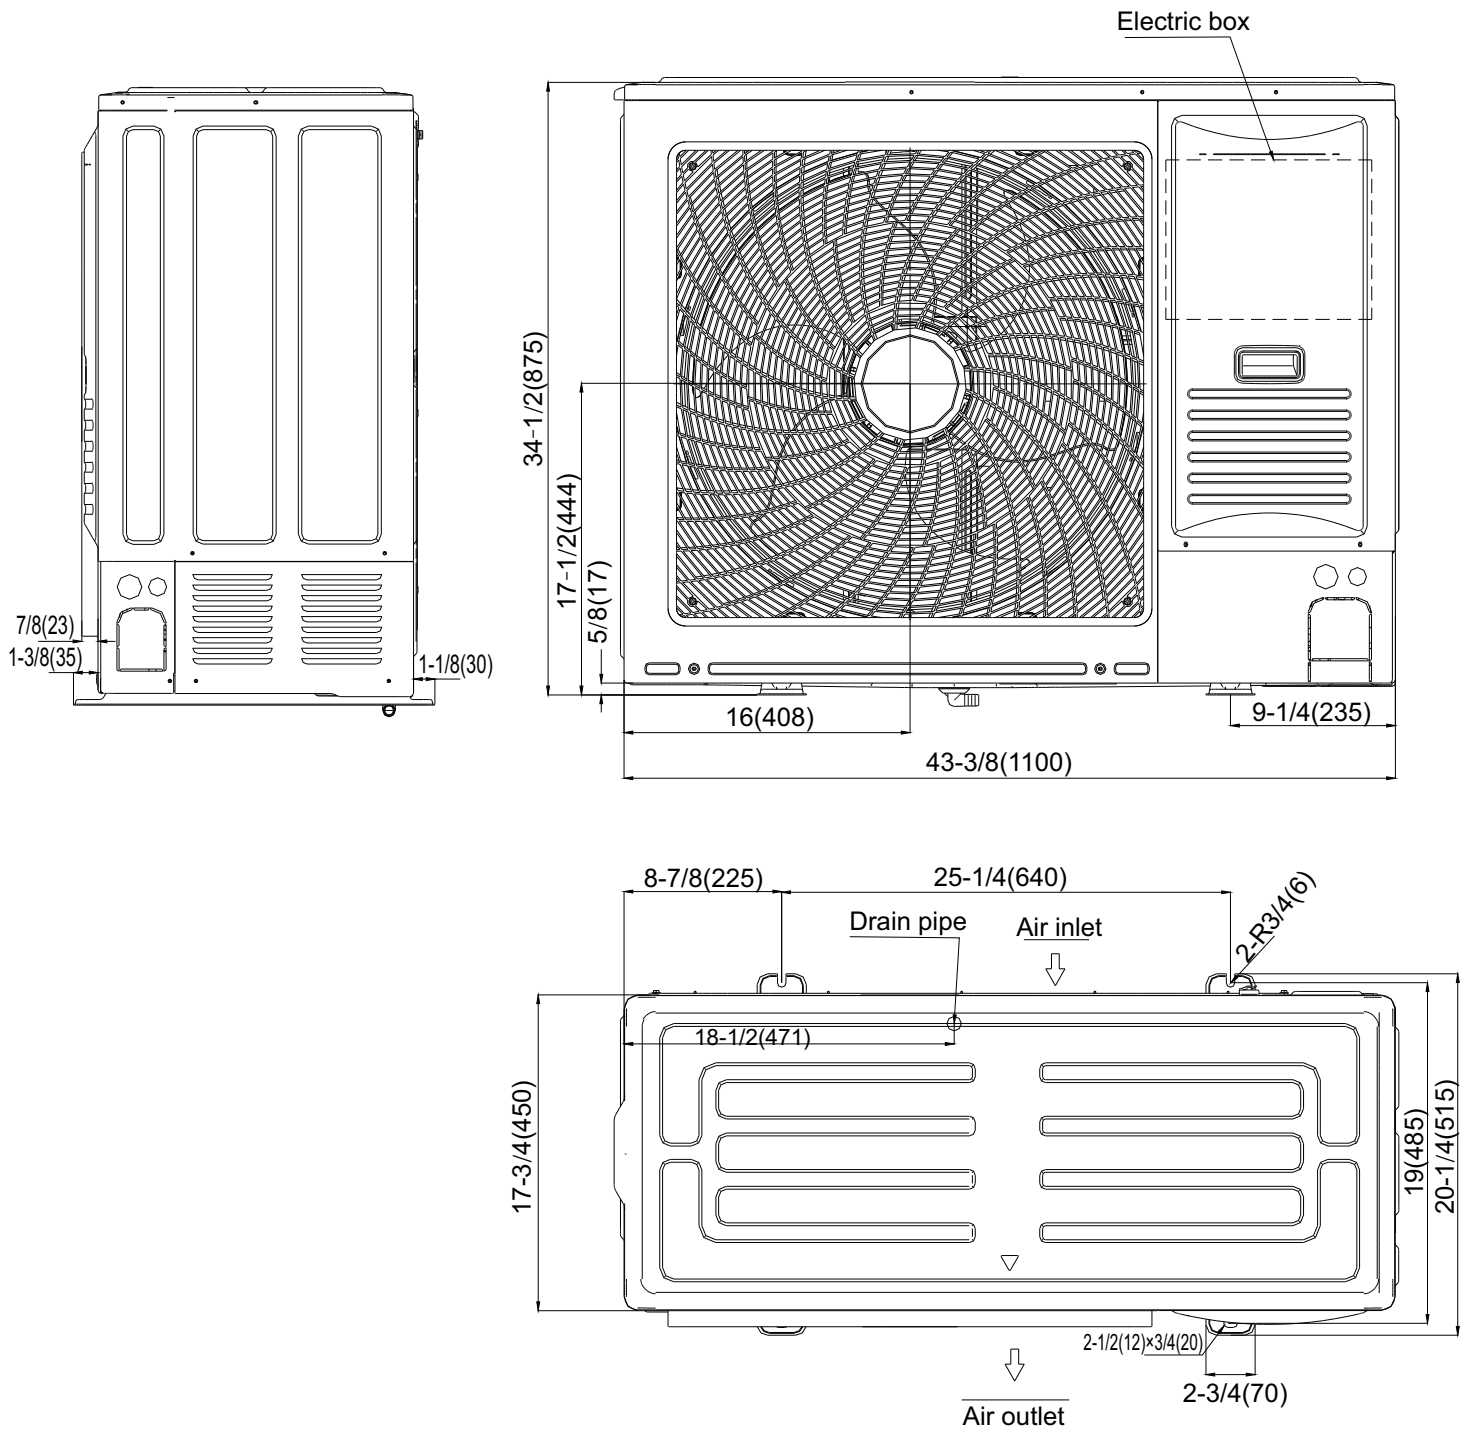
(48-60k BTU Outdoor Unit Dimensions)
